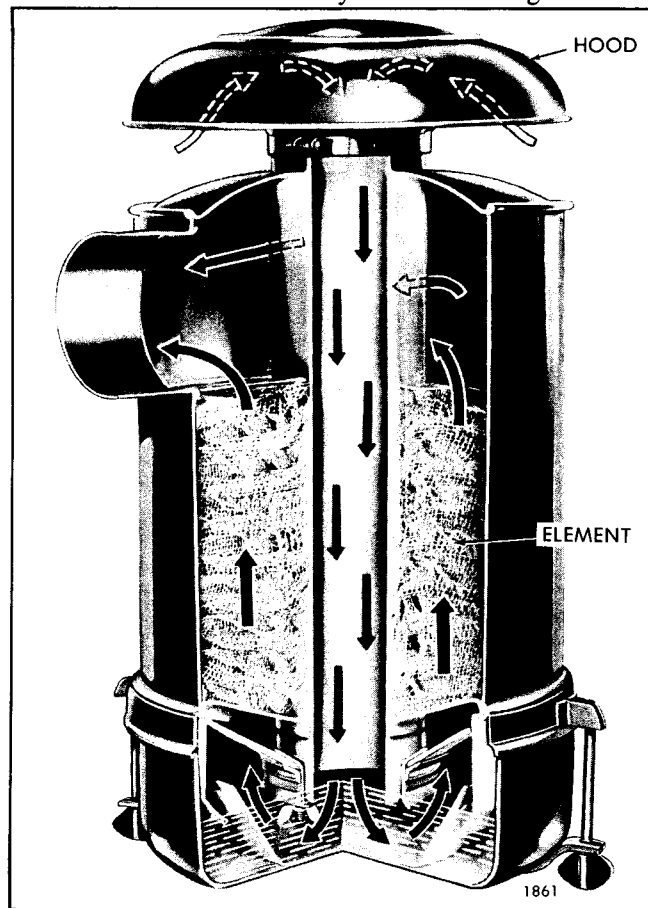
Heavy-Duty Oil Bath Air Cleaner
